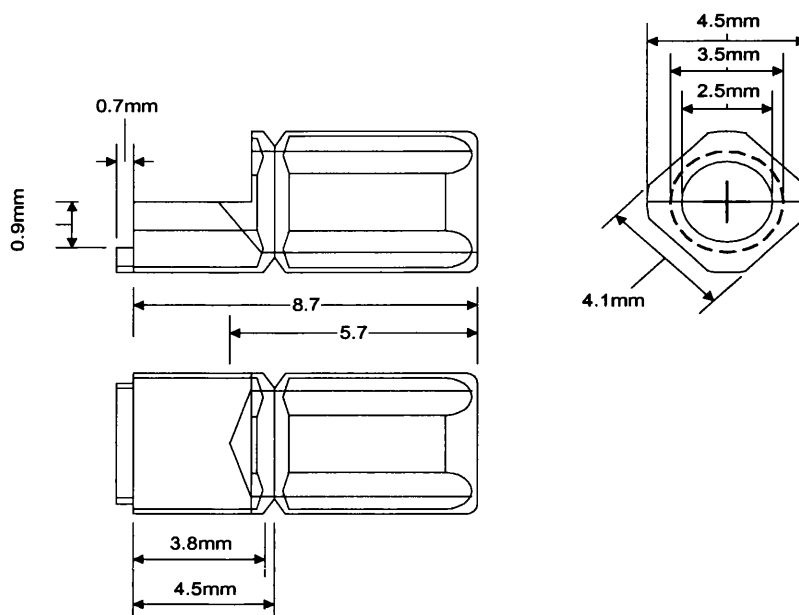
The design of the sample stub used in the CM20's tomographic specimen rod. This is not a scale drawing but dimensions are given.
